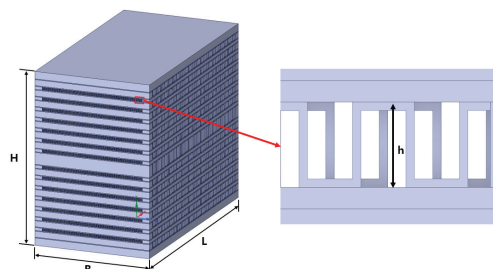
Primary dimensions of the oil cooler and front view of the offset strip fin
